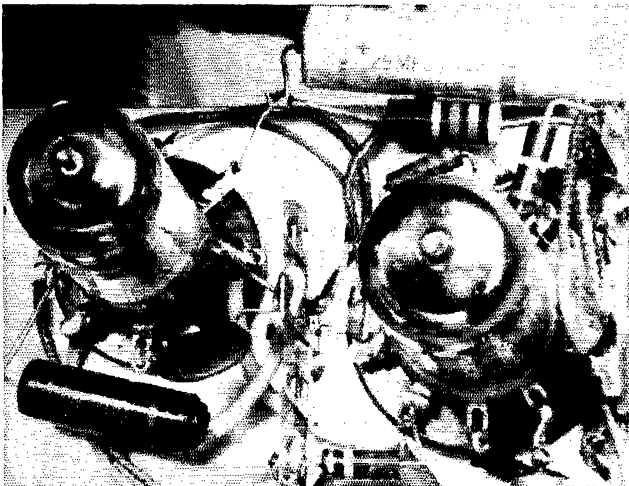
No-scar modifications can be made to existing equipment by using the above-chassis tube sockets shown in the photograph.
